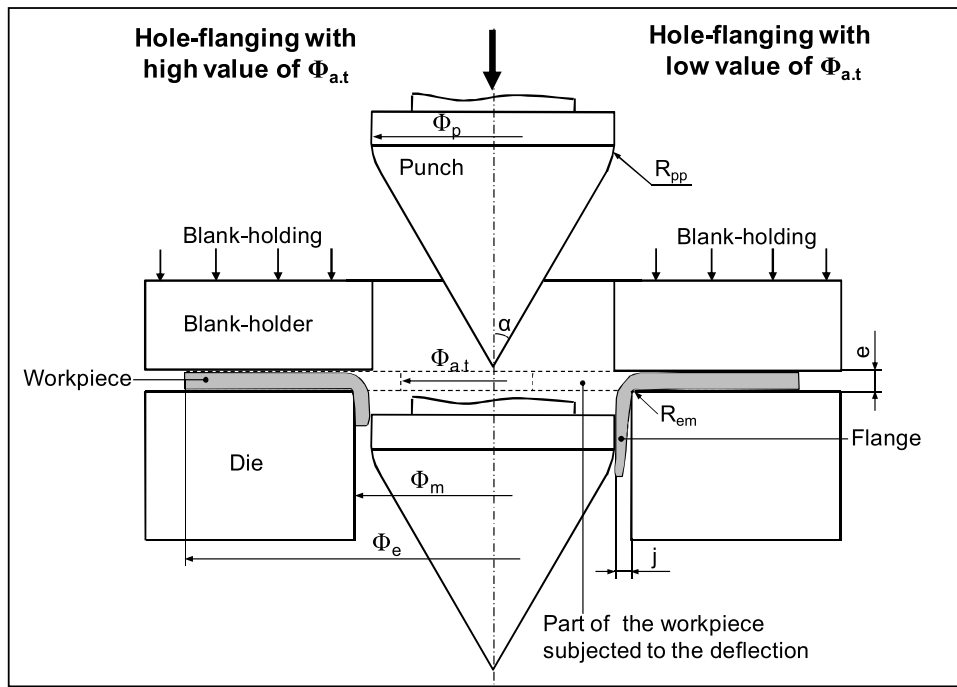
Tool geometry parameters of the conventional hole-flanging process.
